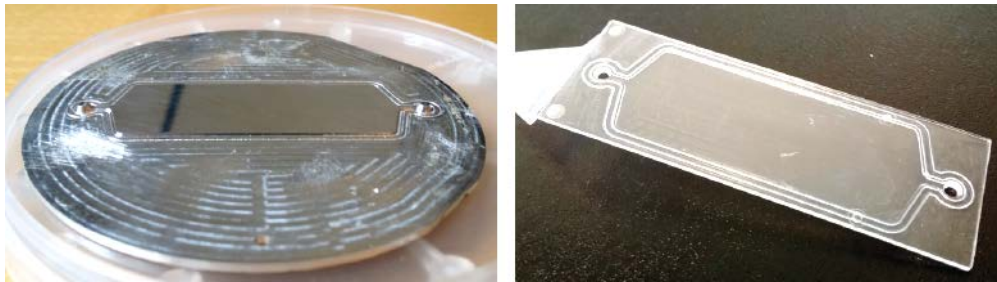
Left: Micro-milled aluminum mold for the molding of culture chamber, EDs and through holes to make fluidic connectors. Right: Injection molded replica.
